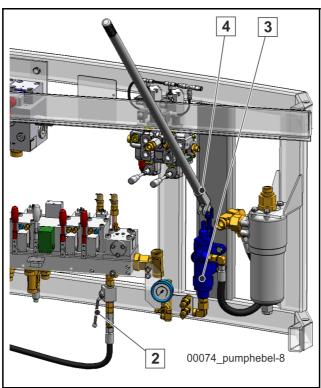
Ball valve (2), emergency hand pump (3) and pump lever (4) in the control cabinet
